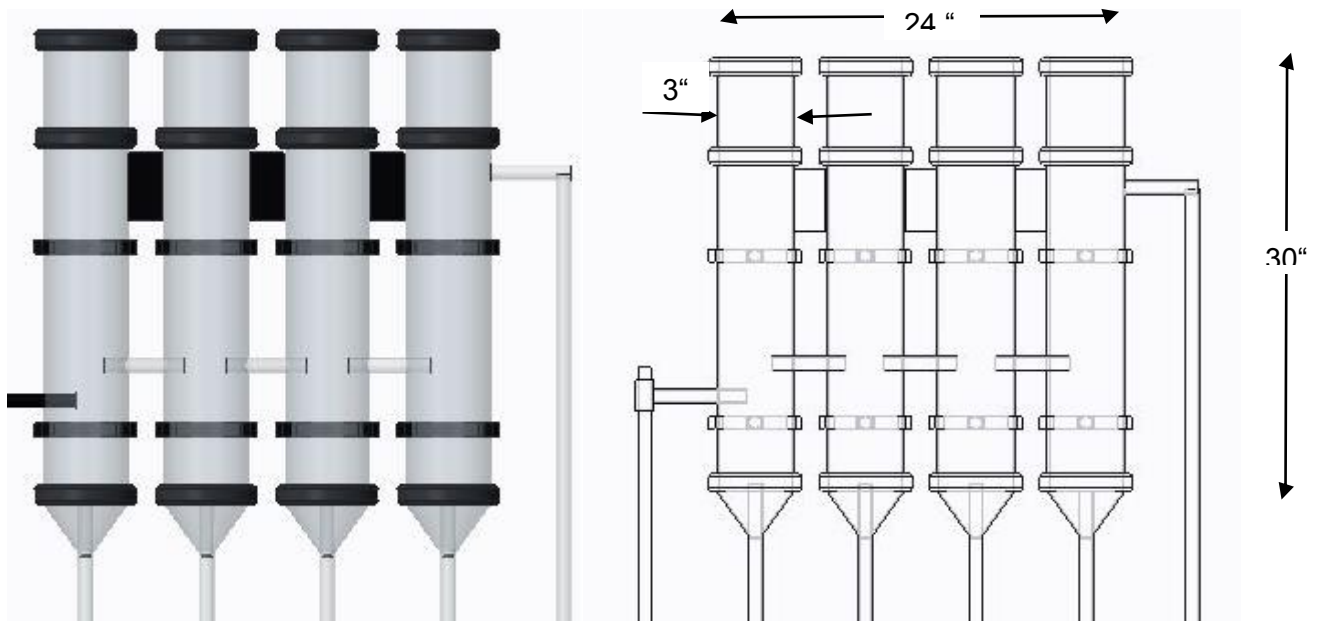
(Left) Color view of airlift tubes assembly, (right) hidden line view of airlift tubes assembly.
